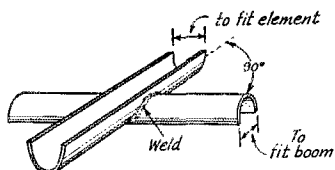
The clamp for the driven element is made by splitting 1-foot lengths of iron pipe and welding them together as shown.
